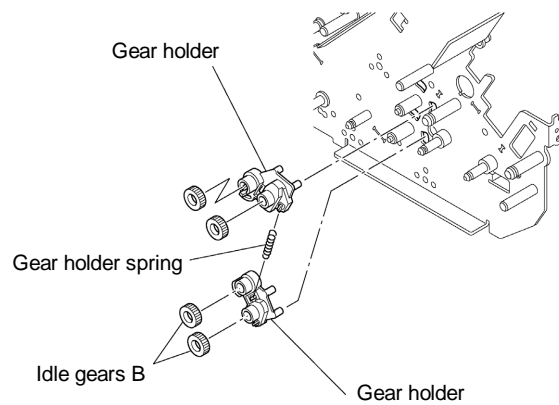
Removing the Gear Holders and Gear Holder Spring
